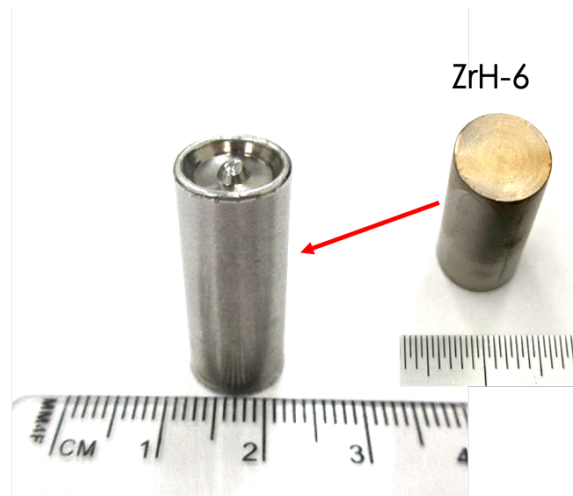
As-welded FeCrAl crucible containing zirconium hydride rod.
